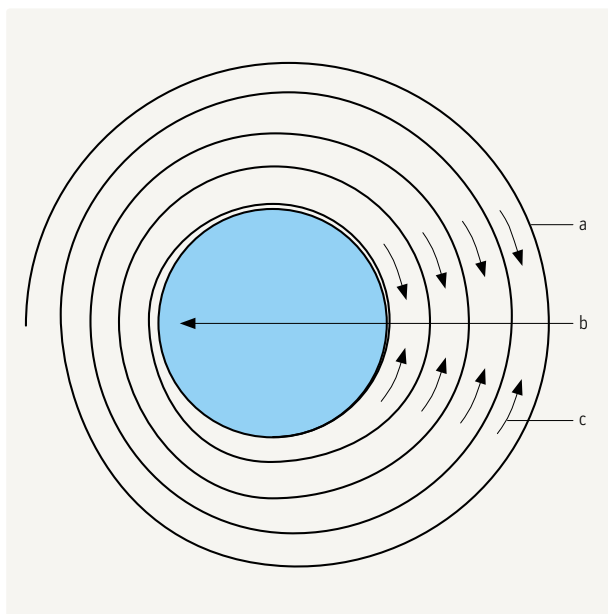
Spindle damping function: a, spiral spring; b, spindle blade; c, oil flow
